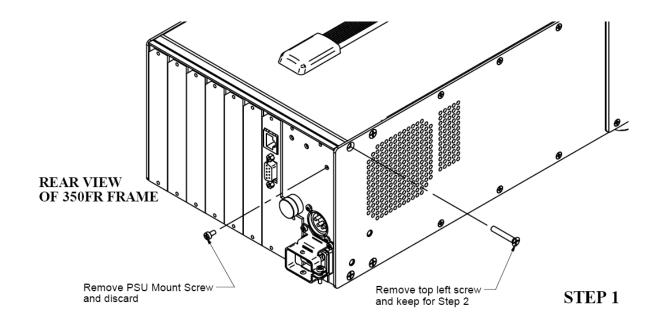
Fiber Breakout Bracket Contents and Final Assembly
